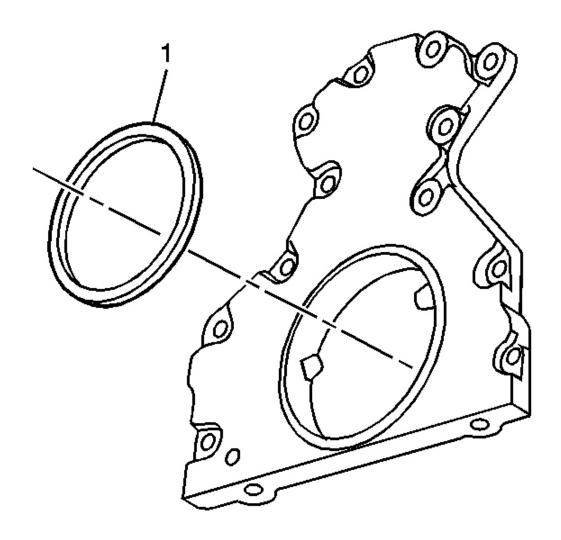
View Of Crankshaft Rear Oil Seal Courtesy of GENERAL MOTORS CORP.
